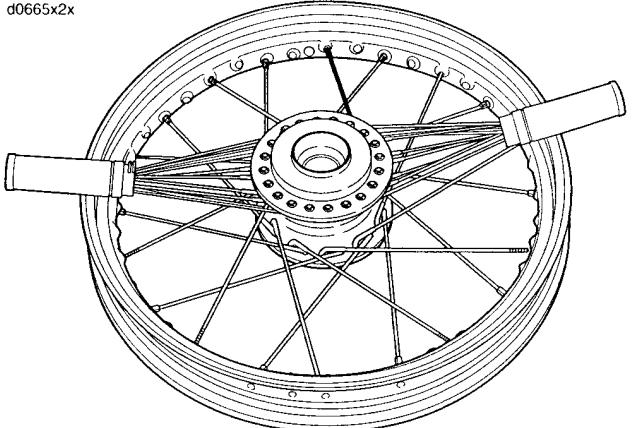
Beginning Spoke-Bottom Flange Inner
